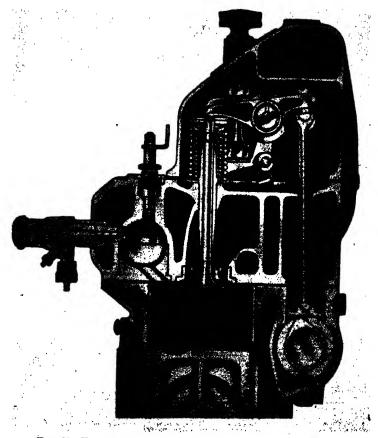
THE A.E.C. CYLINDER HEAD WITH MODIFIED COMET COMBUSTION CHAMBER AND SLIGHTLY DISHED PISTON CROWN
